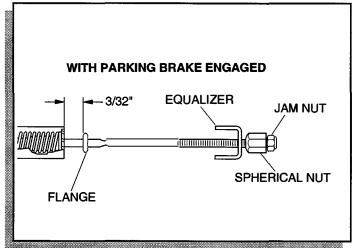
Checking Accelerator Rod Adjustment Parking Brake Adjustment
